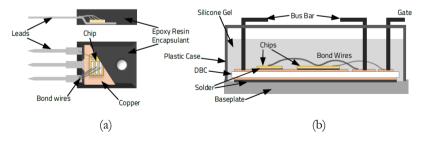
Conventional SiC MOSFET package structures: (a) discrete device with TO-247-3 package; (b) power module [35].
